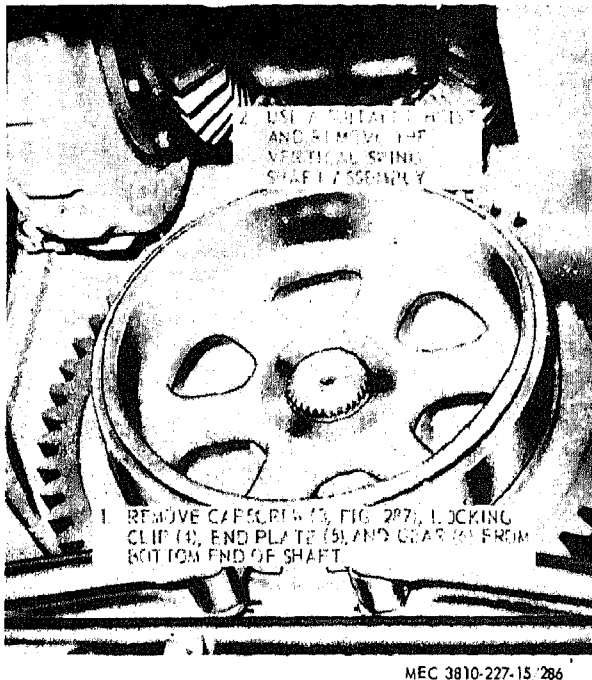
Crane vertical swing shaft assembly, removal and installation.
